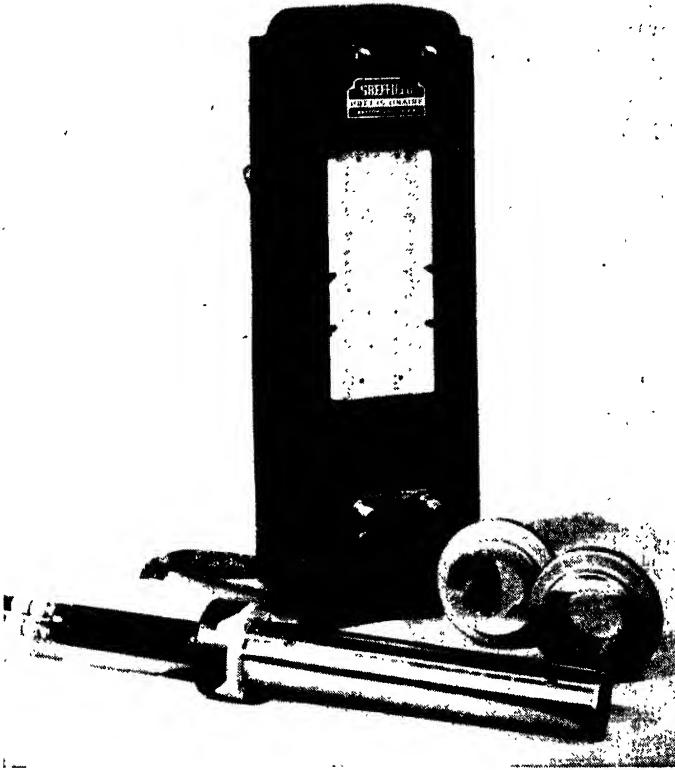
28. Precisionaire indicating internal comparator with remote spindle, arranged as duplex assembly for simultaneously checking two internal diameters. Note adjustable pointers set to mark high and low limits on gage scales, and master setting rings used to set and check gages. (Courtesy of The Sheffield Corporation.)
